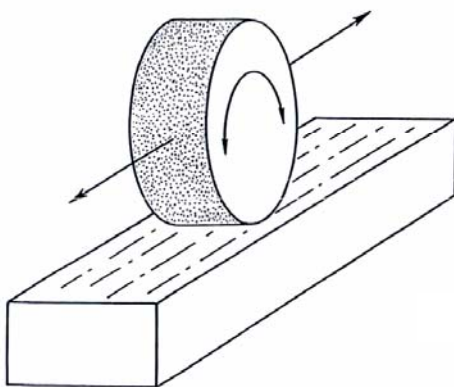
Surface Grinding Parallel to the Specimen Longitudinal Axis
